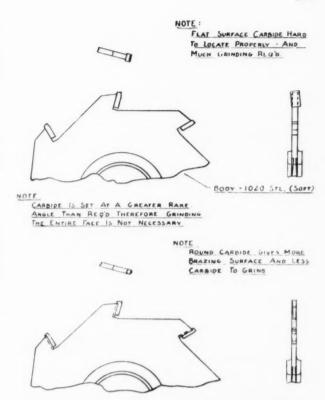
ILLUSTRATING METHOD OF ATTACHING CARBIDES TO NARROW CUTTERS TO REDUCE GRINDING TIME AND ELIMINATE BRAZING FIXTURES
